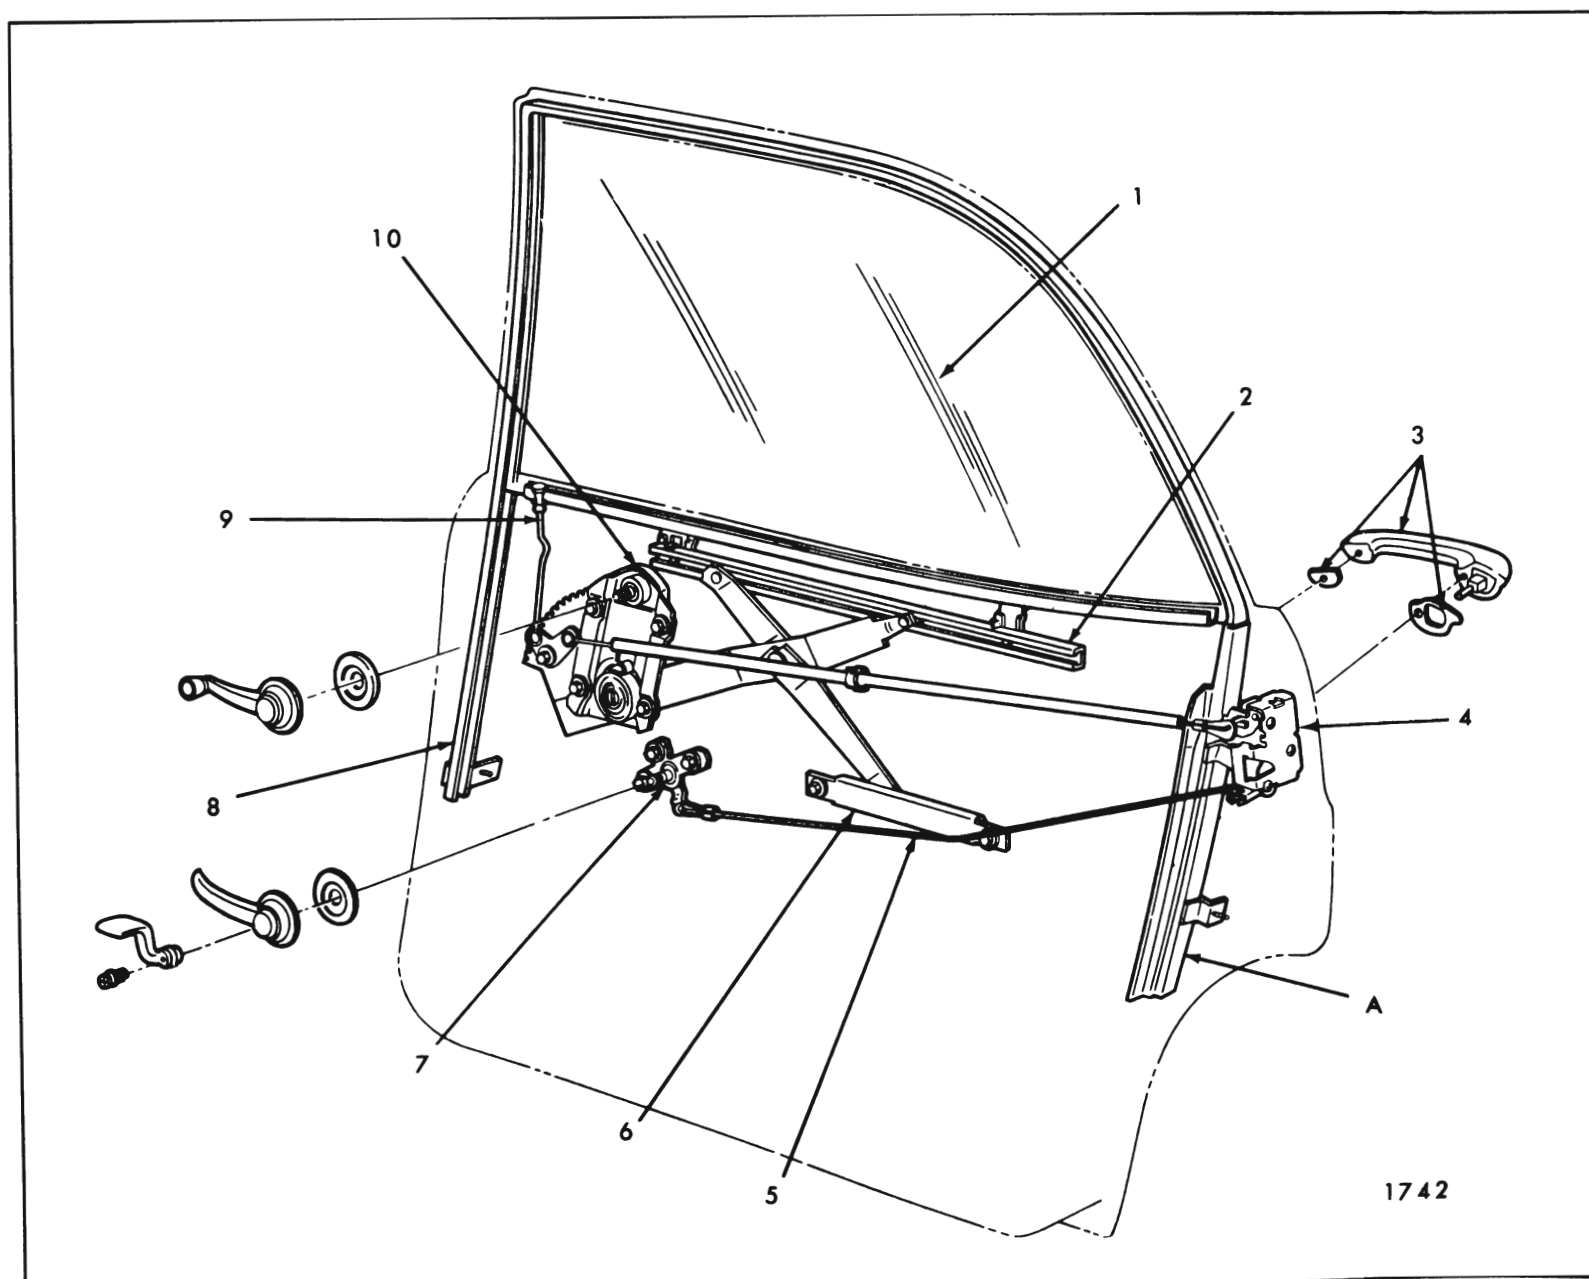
Rear Door Hardware - "B" Closed Styles
